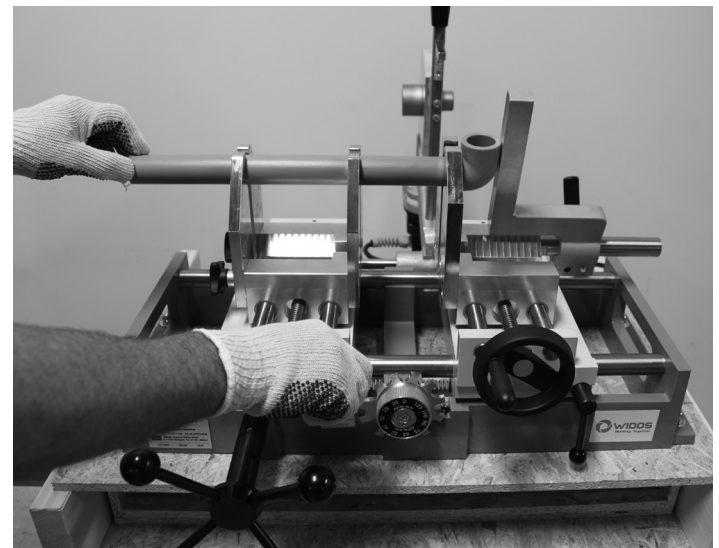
Lay the pipe axially to the fitting and position it so that it is situated flush to the fitting.
